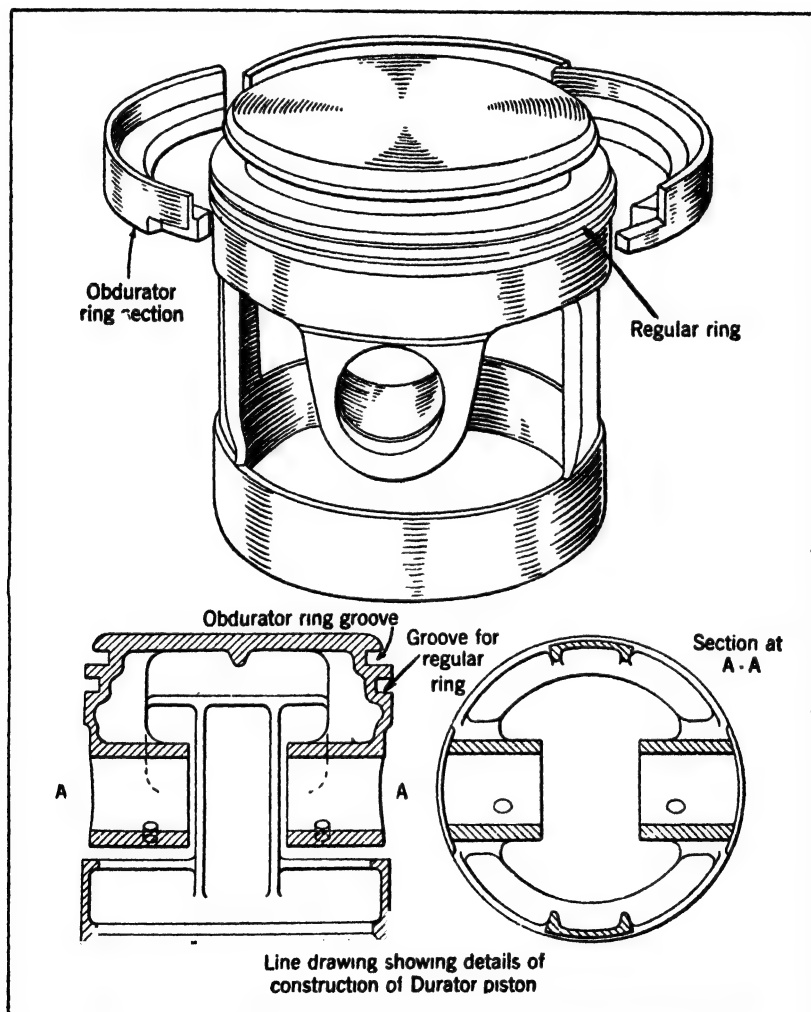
The Durator Piston is a Nickel-Iron Skeleton Member, Carrying One Scraper Ring of Conventional Form and a Special Three Piece Alloy Ring at the Top, which is Expanded by Gas Pressure. The Piston Bosses are Joined to the Heads by Two Ribs Each.
